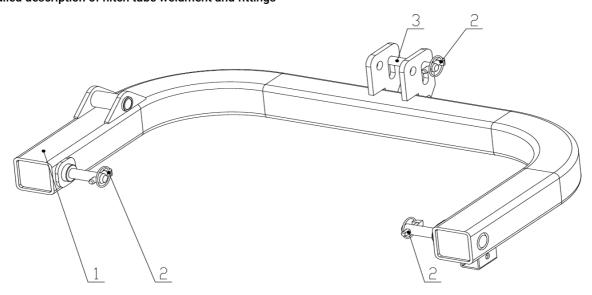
Hitch Tube Weldment and Fittings
